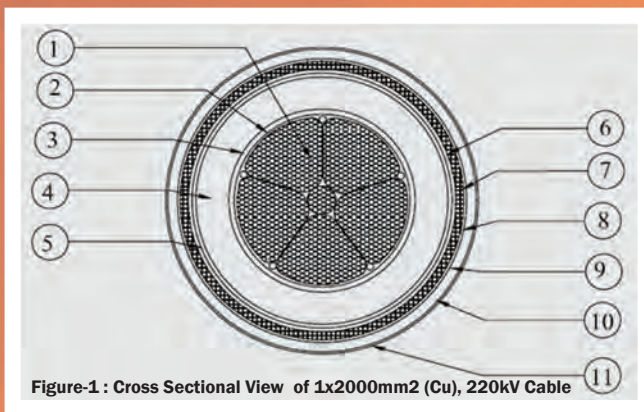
Cross Sectional View of 1x2000mm2 (Cu), 220kV Cable
